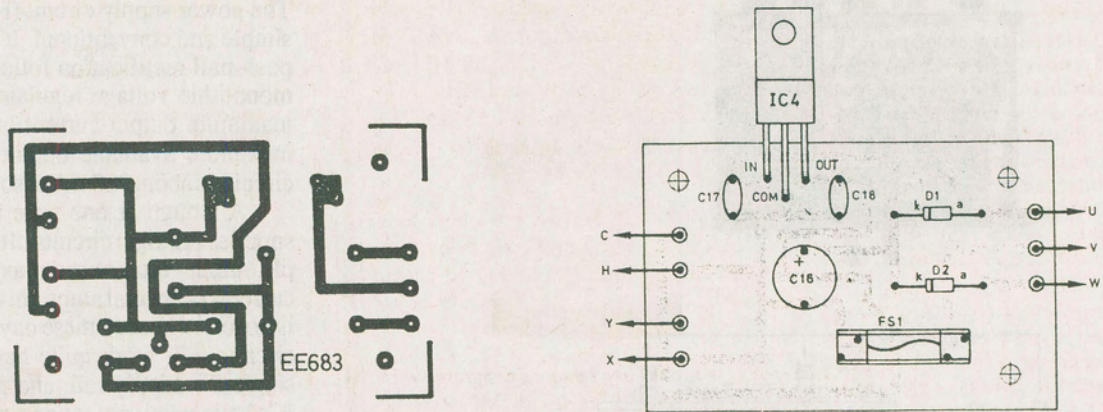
Component layout and full-sized PCB foil pattern for the Power Supply.
